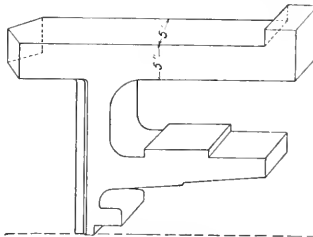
NEW PIECE MADE AND WELDED IN PLACE.
